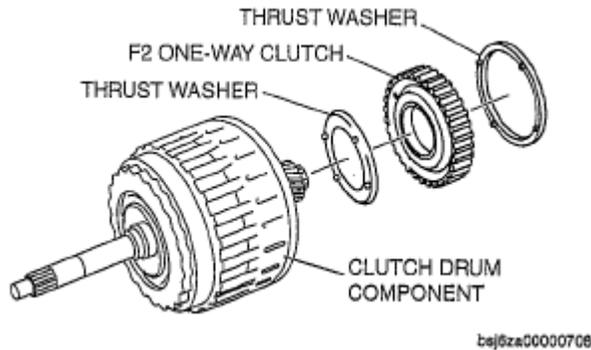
Identifying F2 One-Way Clutch Component To Clutch Drum Component
